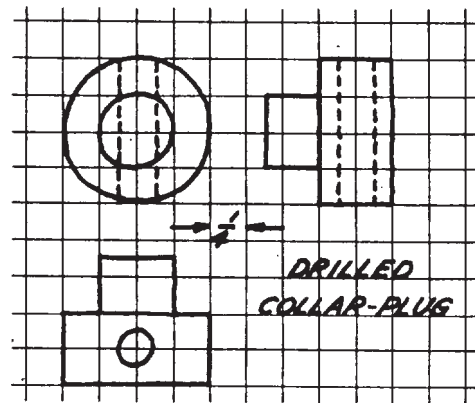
Use of cross-sectional paper in technical sketching.
